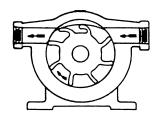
Flexible impeller pump (courtesy of the Hydraulic Institute)
